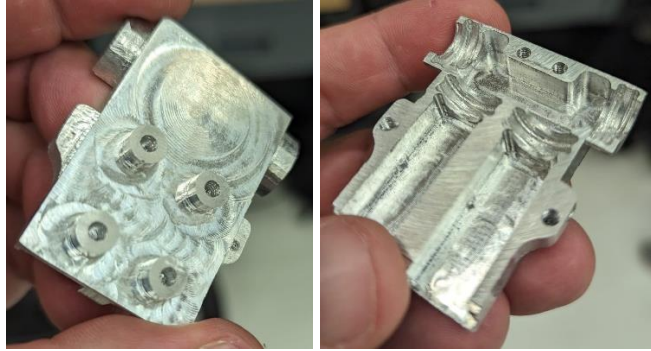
3D Printed (top) and machined (bottom) chassis components.
